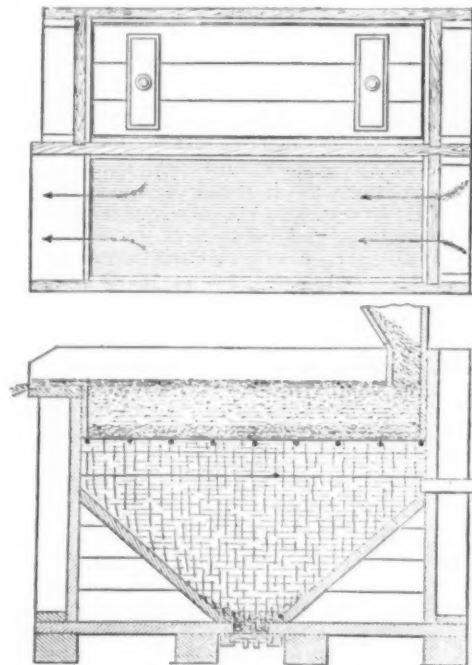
PLAN AND SECTIONAL ELEVATION OF A TYPICAL MODERN JIG.
